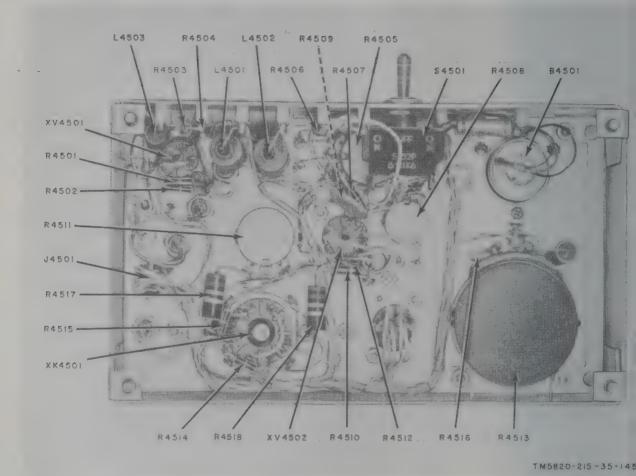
Tsb modulator, age unit, bottom view showing resistors.
